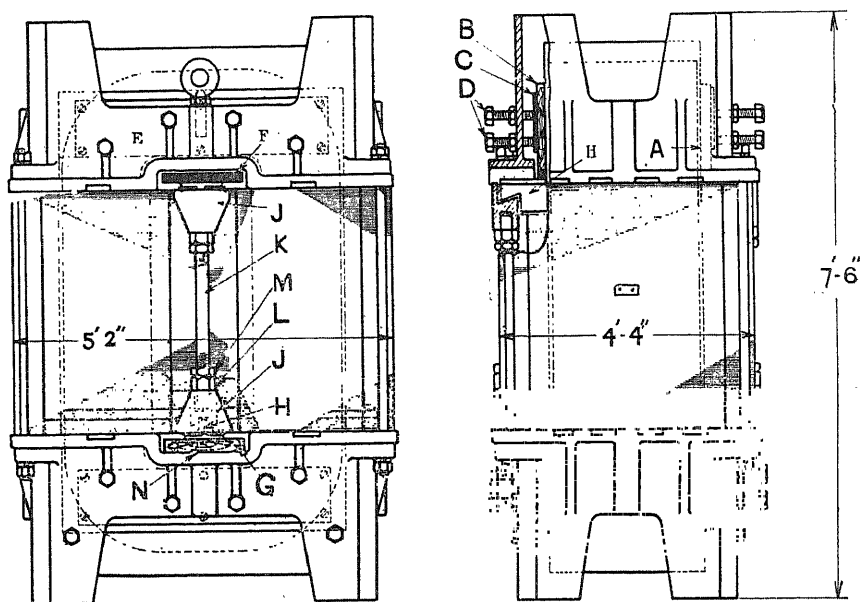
Coil Bracing Arrangements on a Shell Type Transformer
